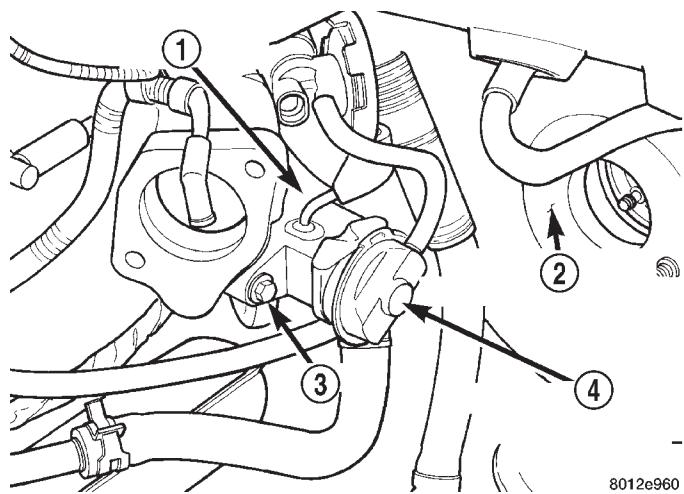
Master Cylinder Attachment To Vacuum Booster
